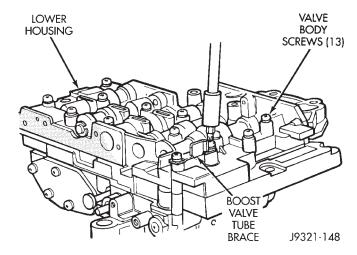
Valve Body Screw And Tube Brace Location—46RH
